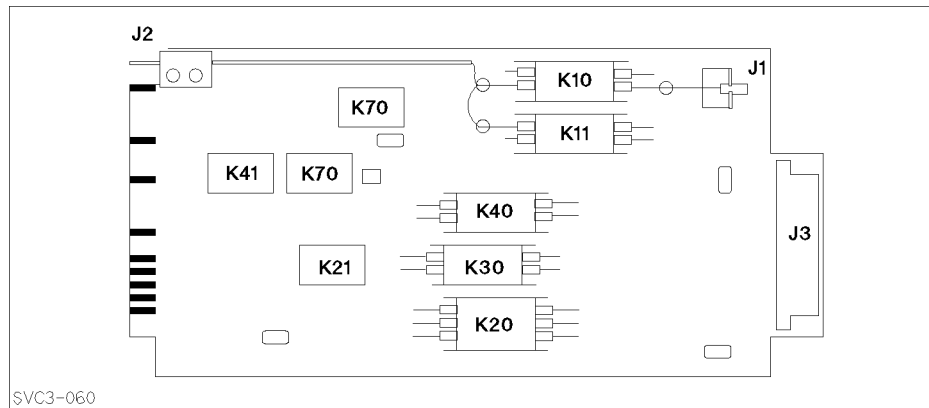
Part Locations of SMU Port Board—96-pin SWM
